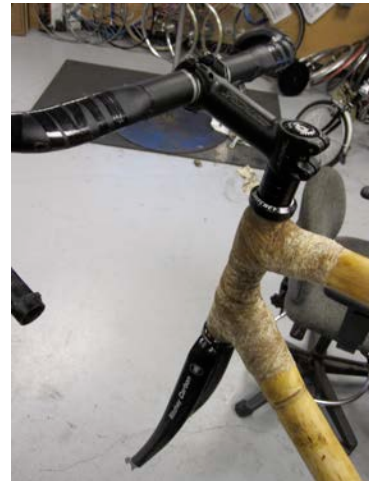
Headset, Fork, Stem, and Handlebars installed. All but the headset cups, which were press-fit into the frame, were removed before finishing.
